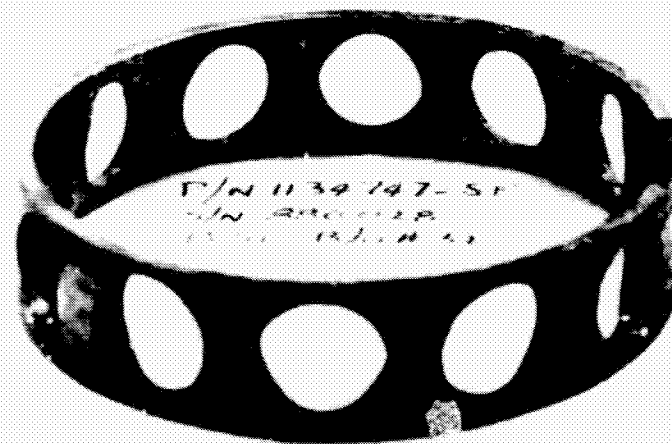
Posttest Appearance of Irradiated PBI-Glass Ball Retainer, Showing Inside Surface and Ball-Pocket Scars
